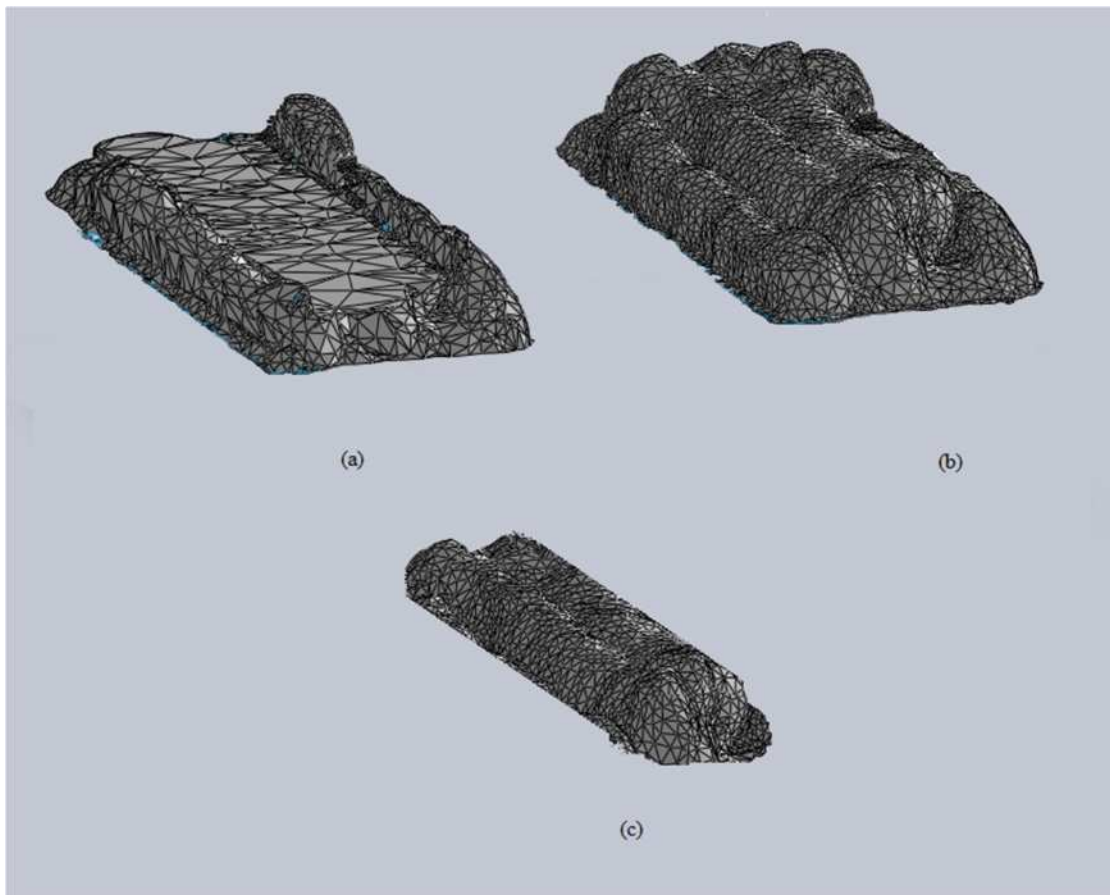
Scanned Deposited Material (a) Machined (b) Original (c) Removed
